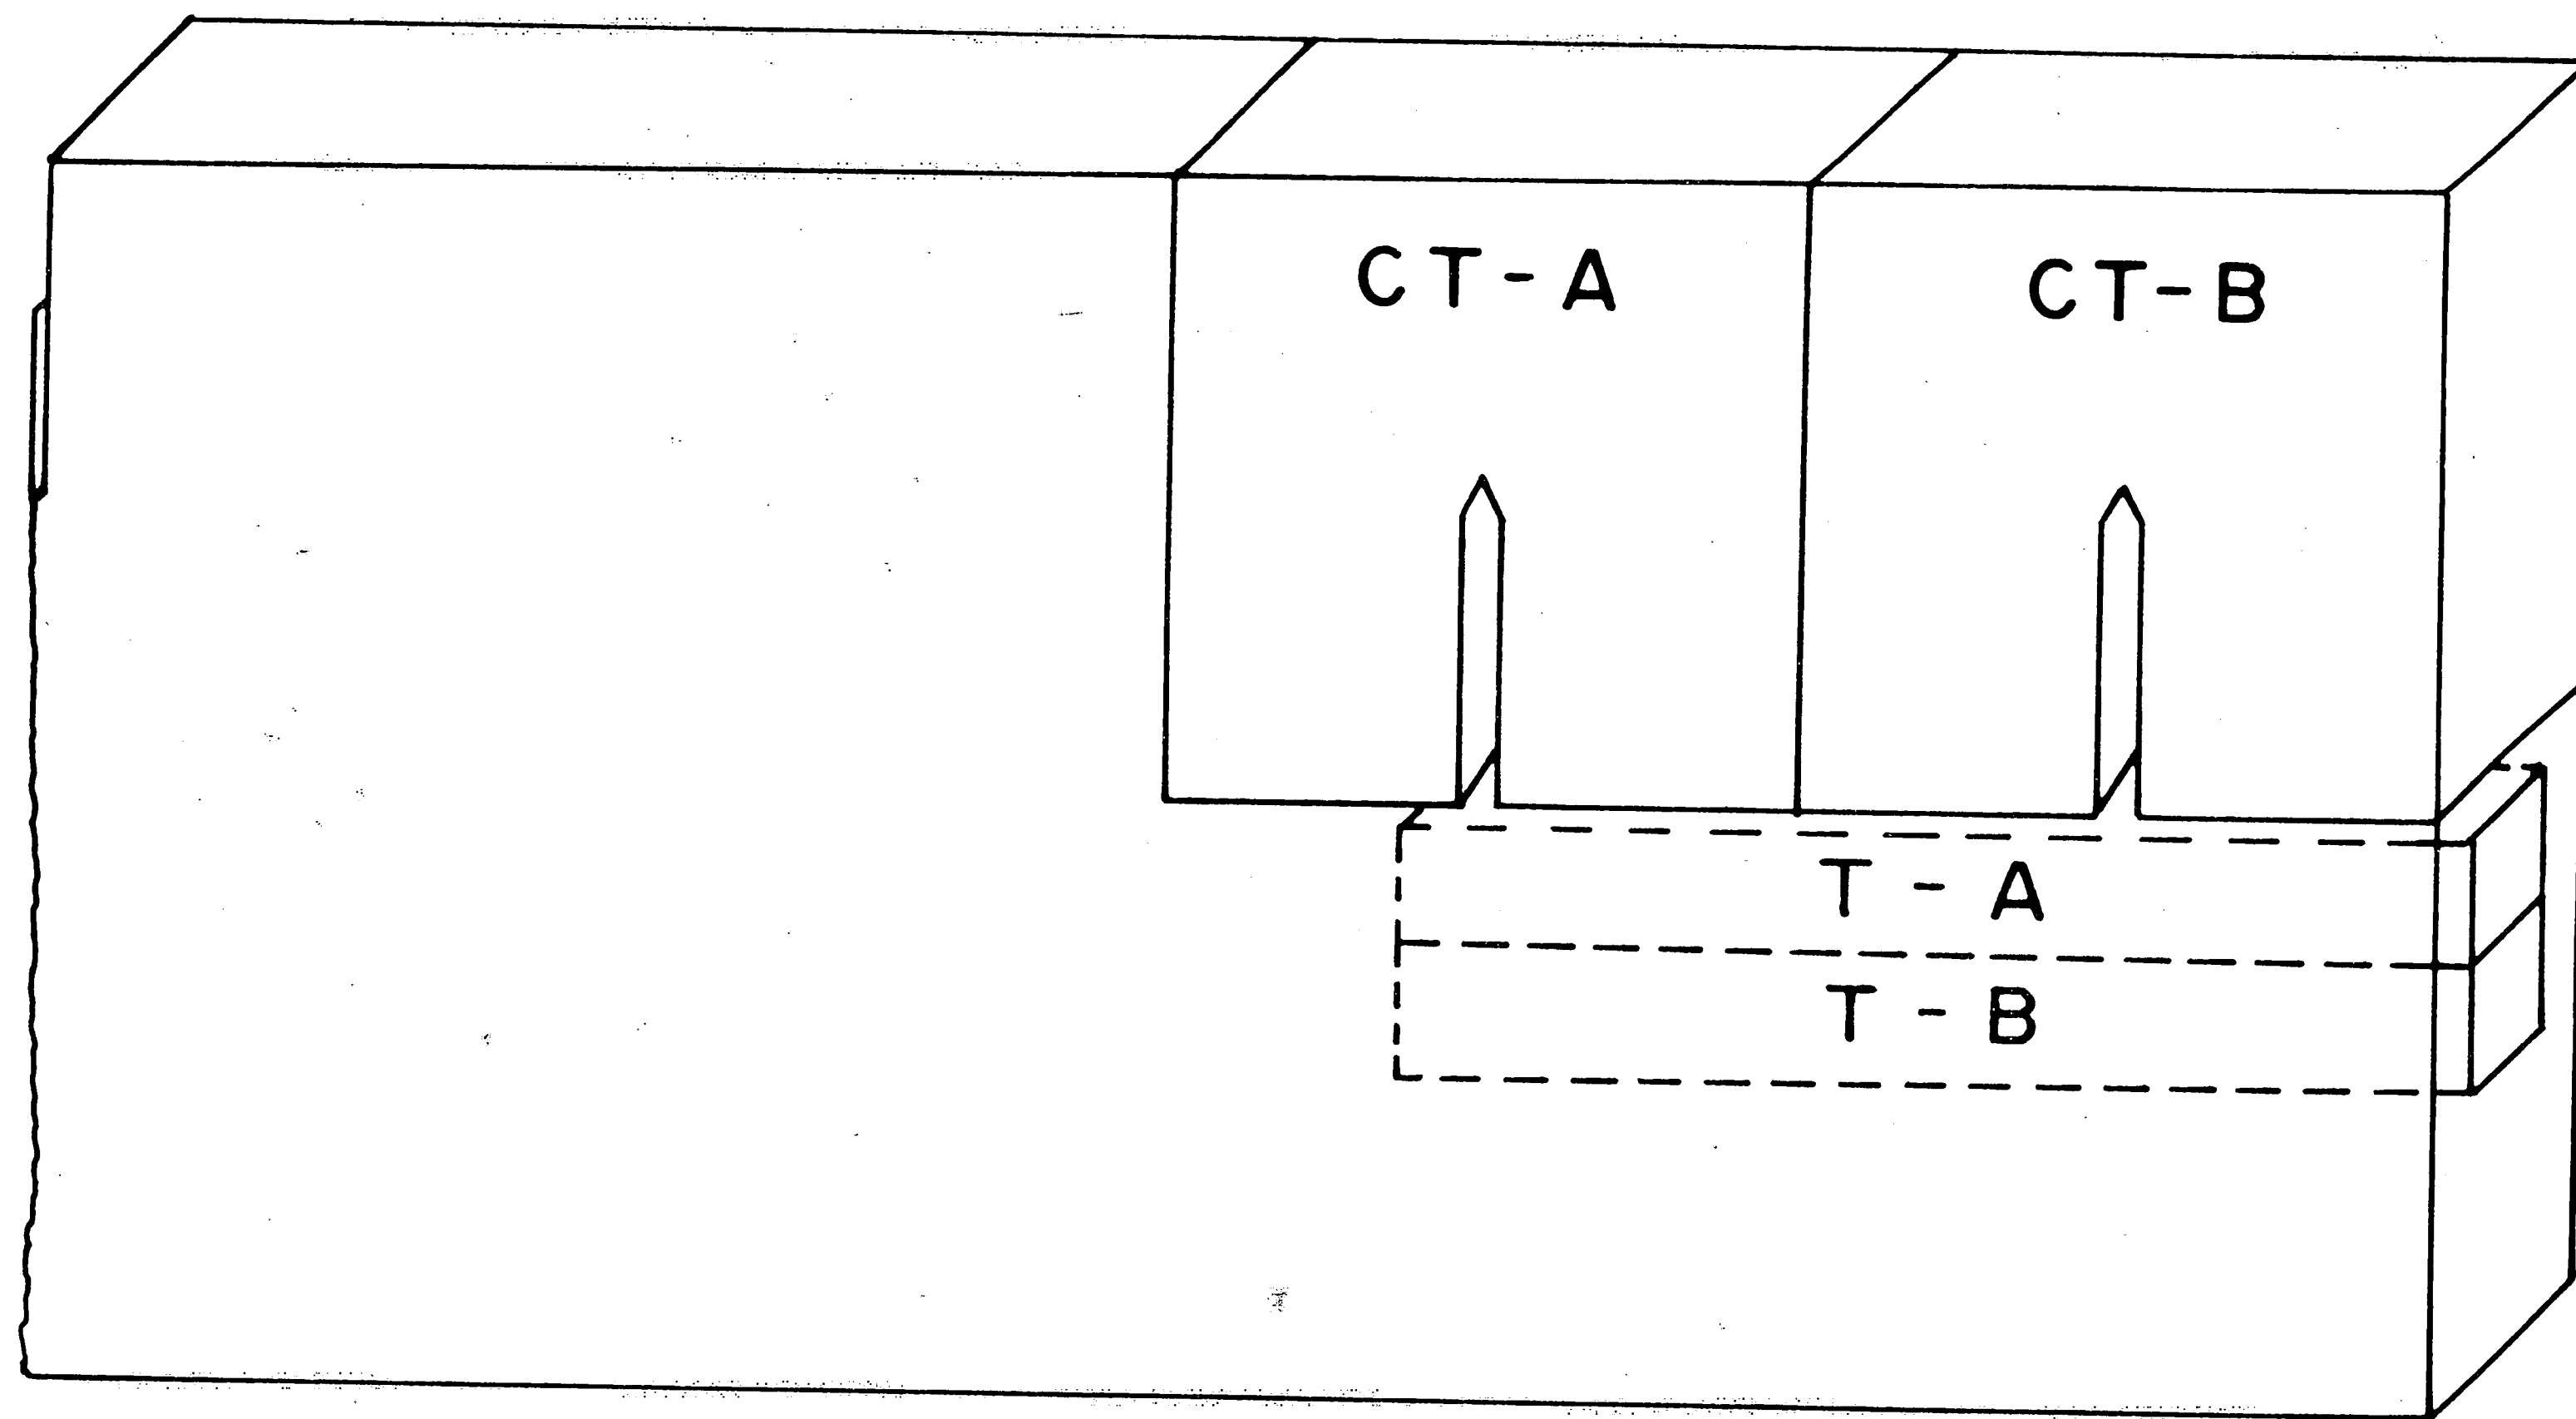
Layout of Compact Tension and Tensile Specimen Removal from Fractured Half of 1-in. RT-K<sub>1D</sub> Specimen
